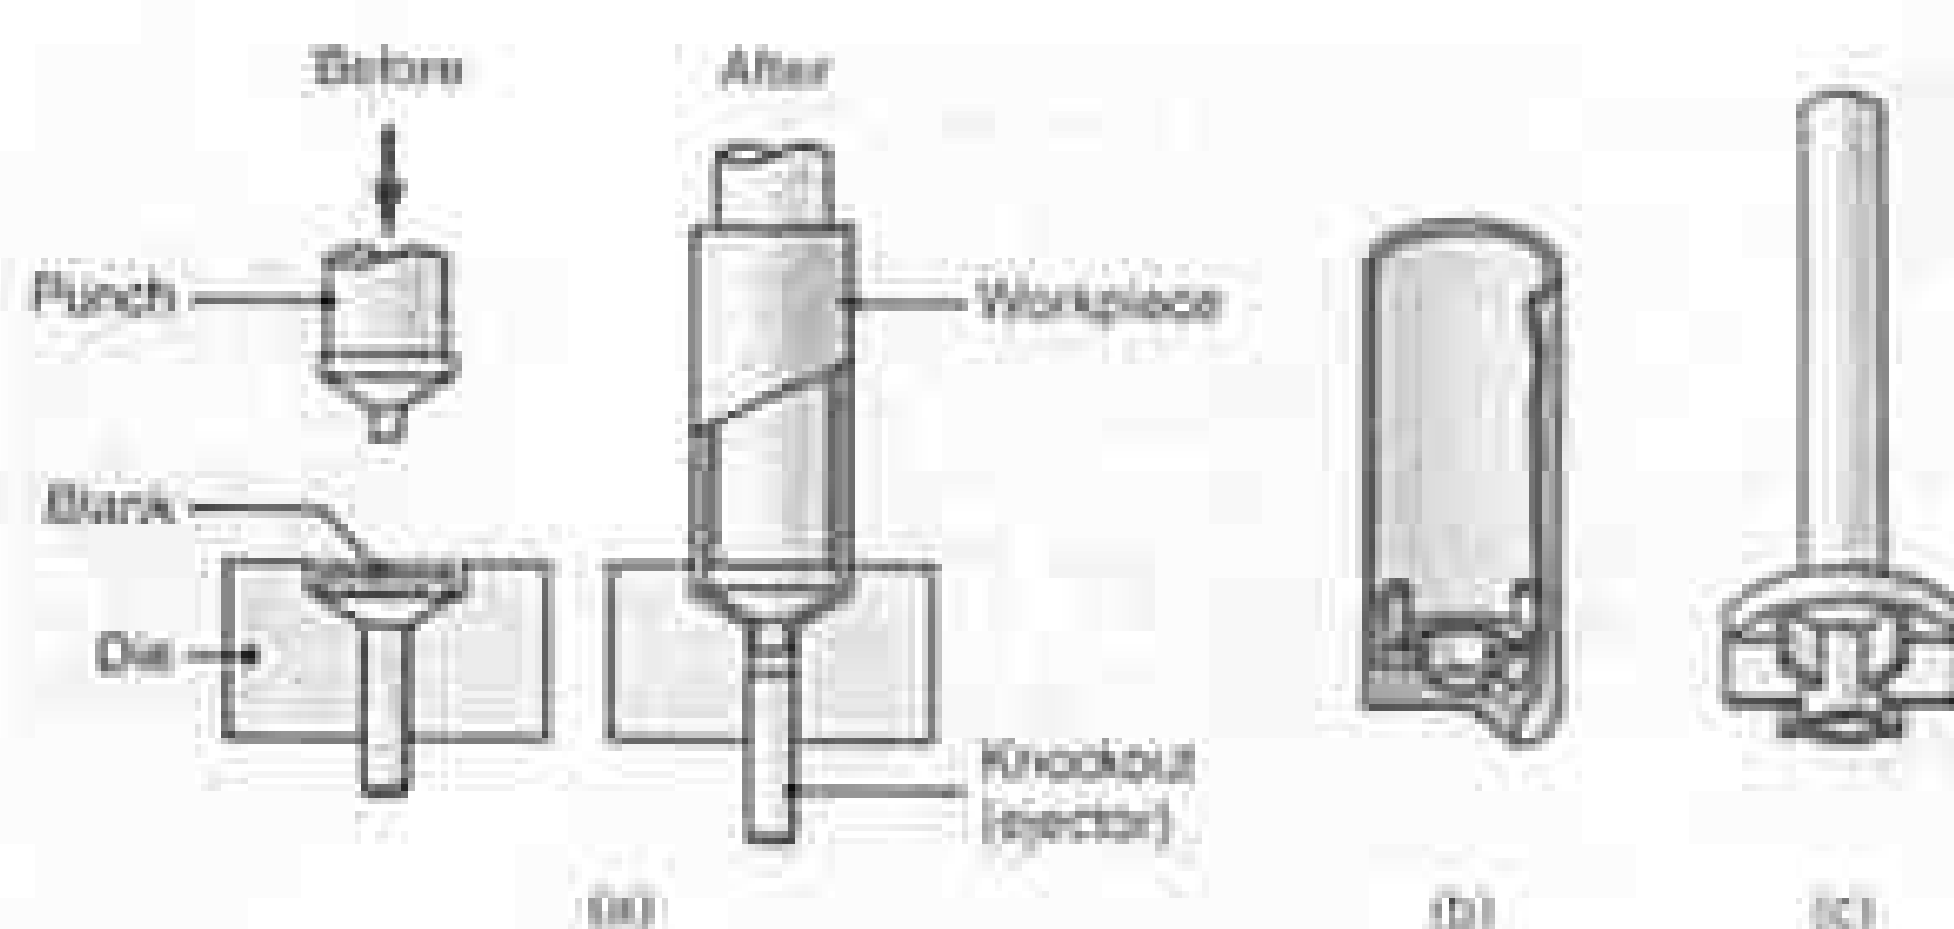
(a) Impact extrusion of a collapsible tube by the Hooker process. (b) and (c) Two examples of products made by impact extrusion. These parts also may be made by casting, forging, or machining; the choice depends on the materials part dimensions and wall thickness, and the properties desired. Economic considerations also are important in final process selection.
